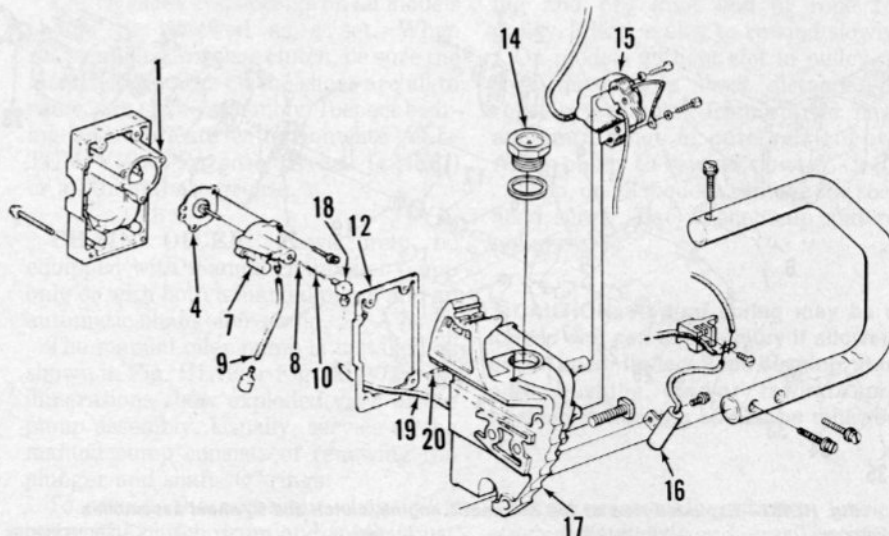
Exploded view of oil tank and related assemblies. On models equipped with solid-state ignition, condenser (16) is not used and ignition module is located in place of ignition coil (15).
